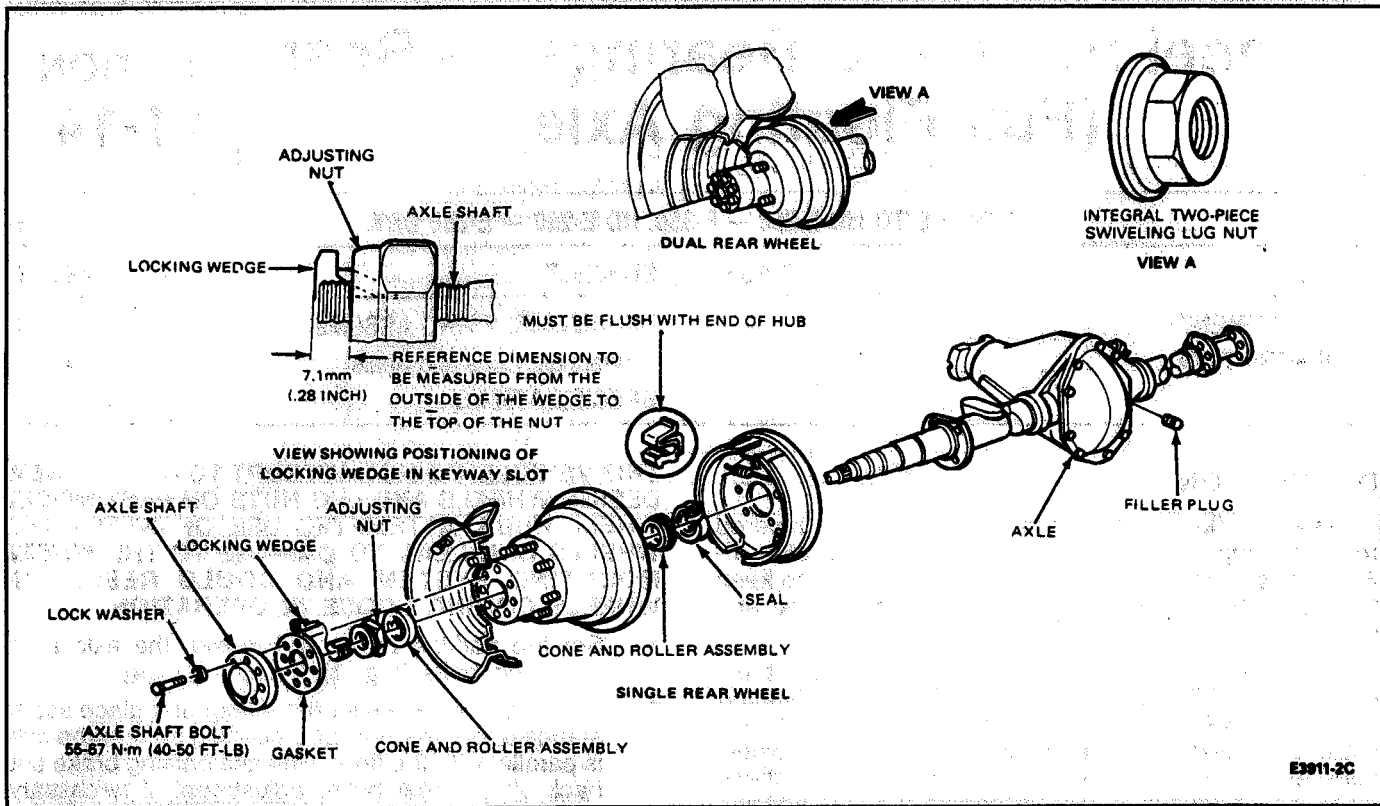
Rear Wheel Hub—Dana Full-Floating Axle HD F-250—F-350, HD E-250—E-350
